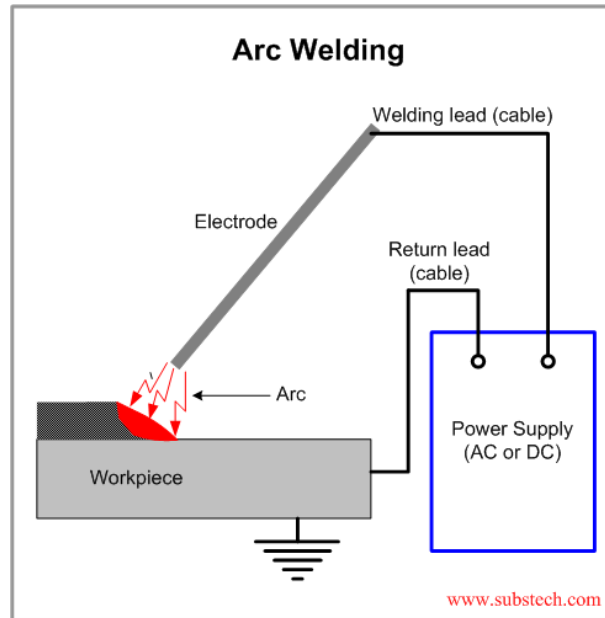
Basic arc welding circuit (Kopeliovich, 2012)
